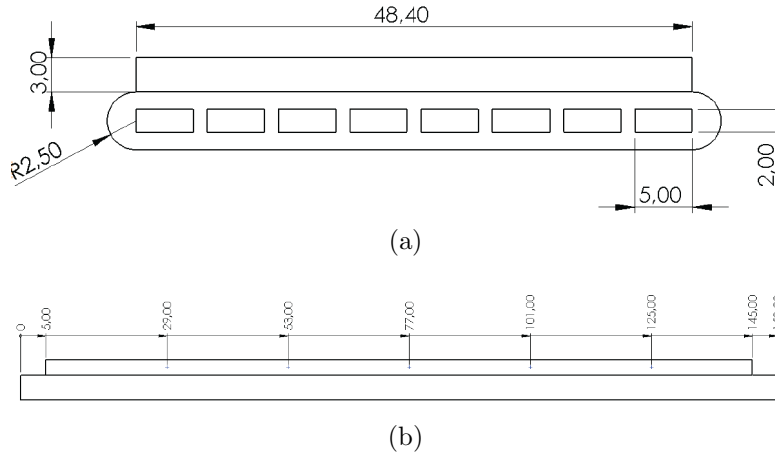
Details of the minichannel HX dimensions. Dimensions are in (mm).
